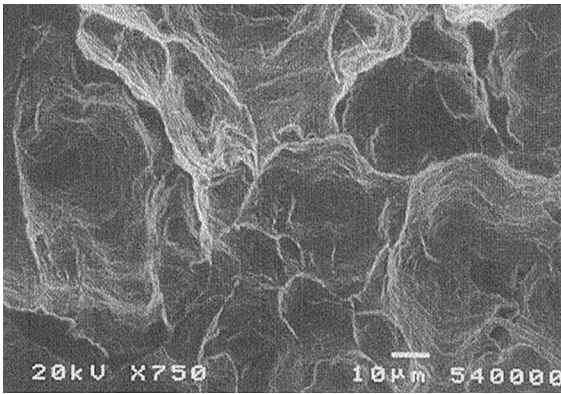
Zirconium loaded at 350°C in air or in argon: ductile dimples all over the fracture surface.
